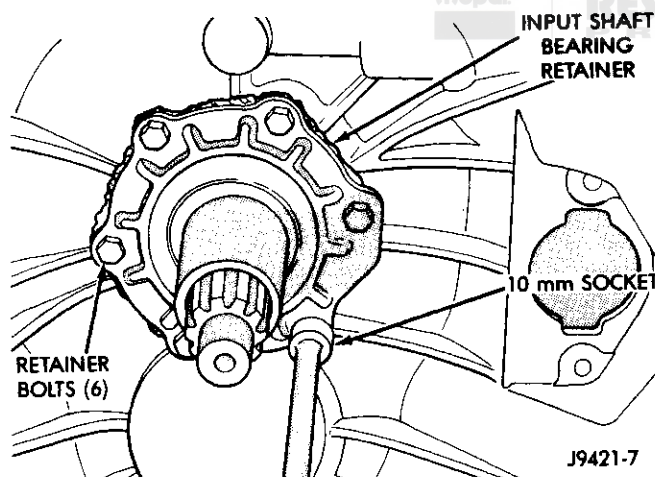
Installing Input Shaft Bearing Retainer Bolts
